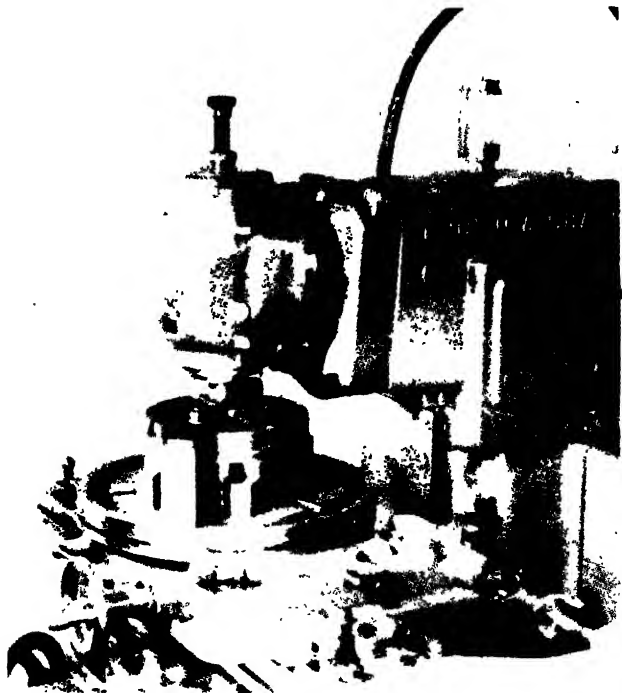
A rotary attachment used on a vertical miller. (*The Brown & Sharpe Manufacturing Company*)
